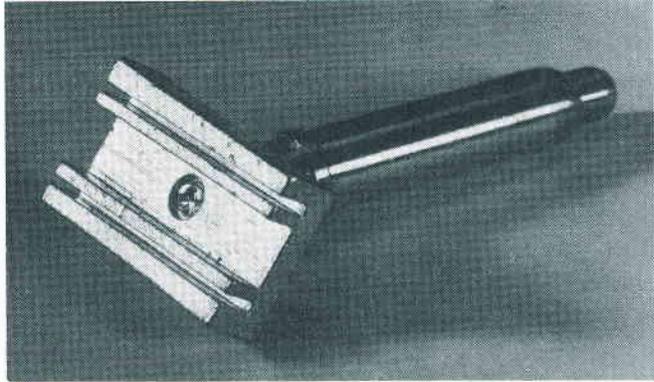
A desoldering tip for removing chips that are soldered to the circuit board.
